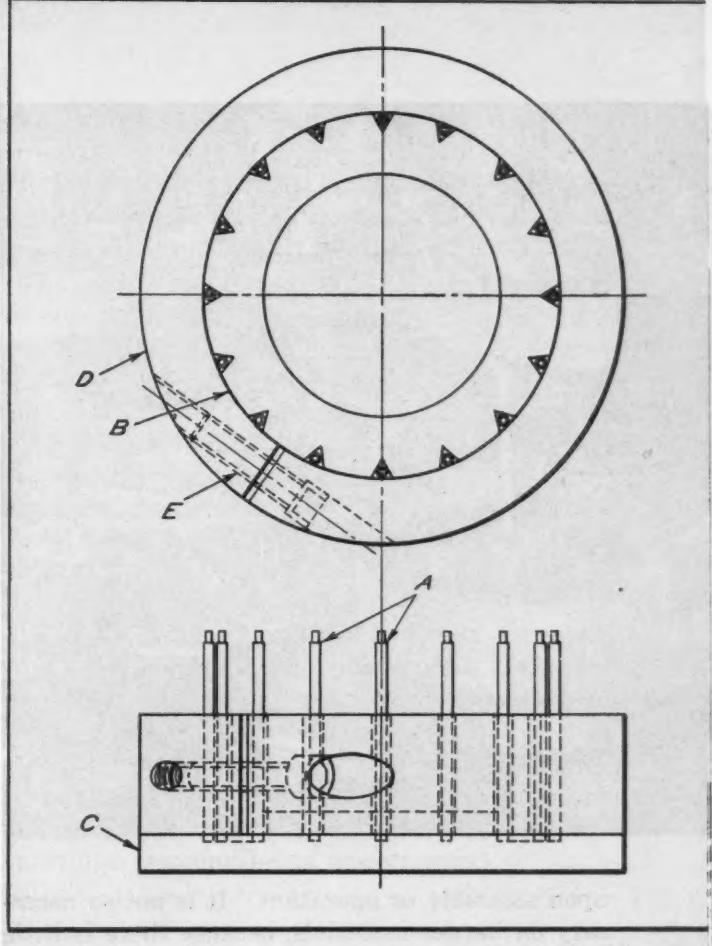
Ends of long, slender pins are lapped flat and parallel by the use of this special work-holding fixture.
